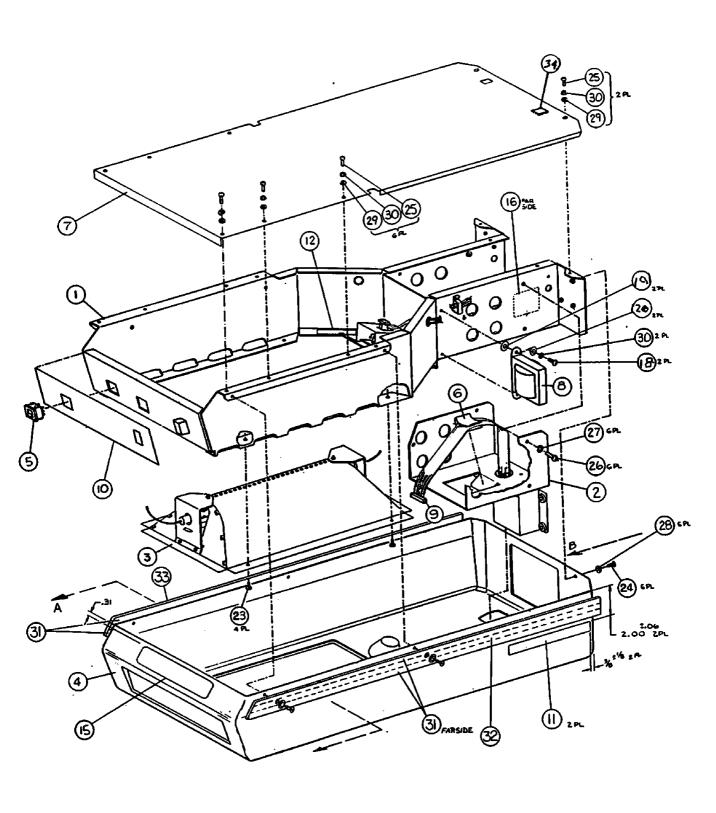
WARMER MODULE ASSEMBLY, PARTS LOCATION DIAGRAM
